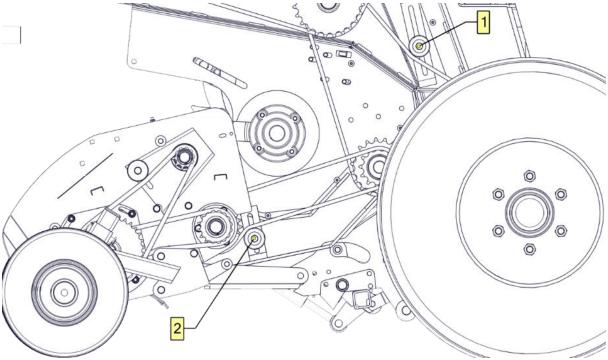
Adjusting the chain tension on the left-hand side of the baler
